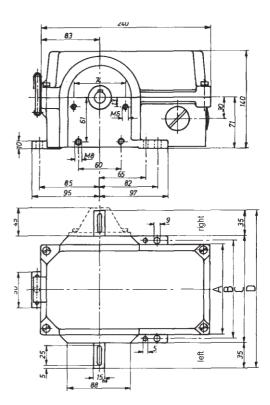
Table of Dimensions LNSW (without gear)
